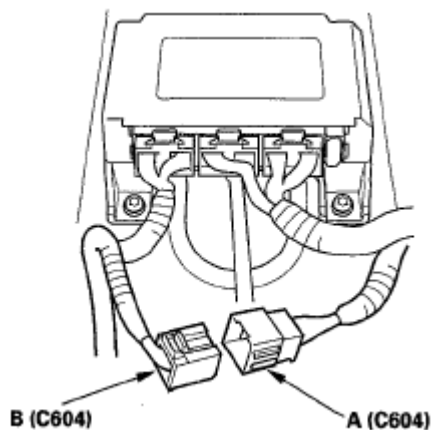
Identifying Right Side Wire Harness 16P Connector C604 (A) And Left Side Wire Harness Connector C604 (B) - '05 Model
